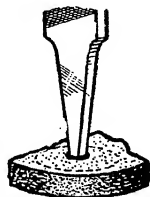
Boring a hole in a broken wheel with the tang of a file.
